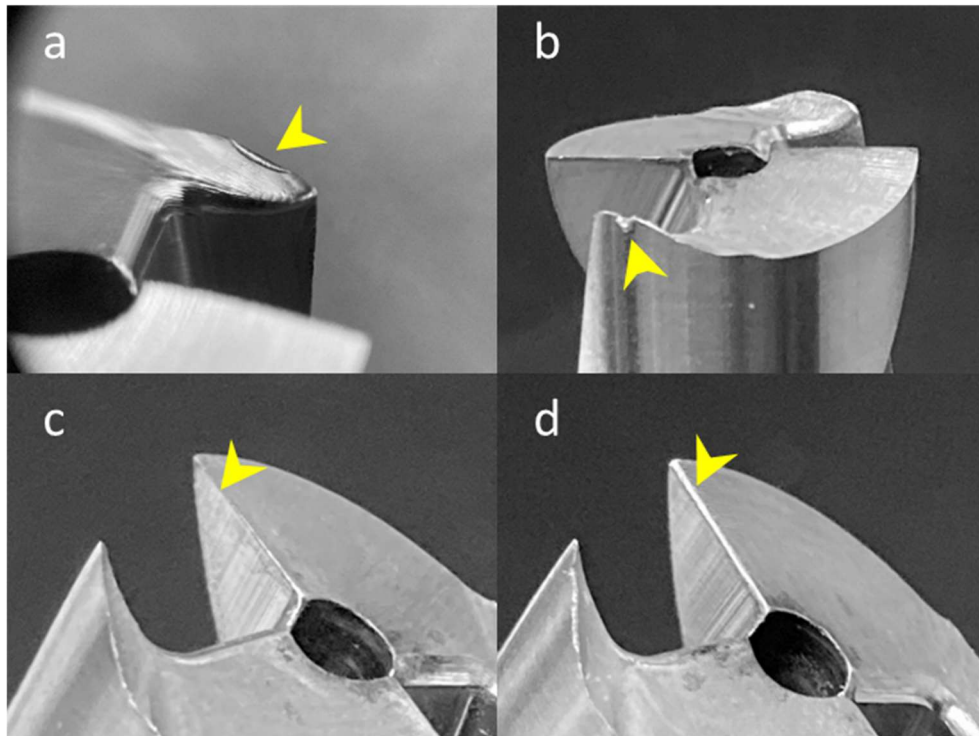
Representative images of a drill incisor with a) a deformed incisor blade; b) damaged incisor blade with a burr; c) sharp cutting blade d) dull cutting blade.
